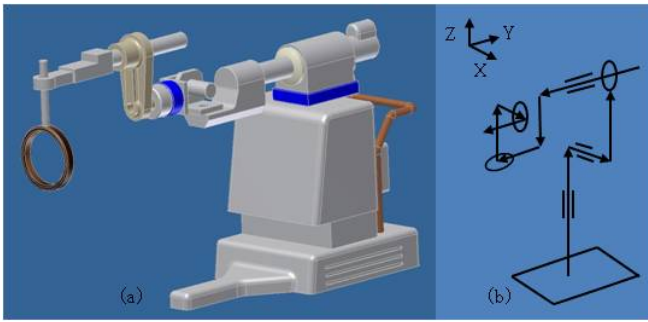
Fracture-reduction robot; (a) outline, two blue parts show mechanical failsafe units and (b) kinematic model and coordinates of the robot
